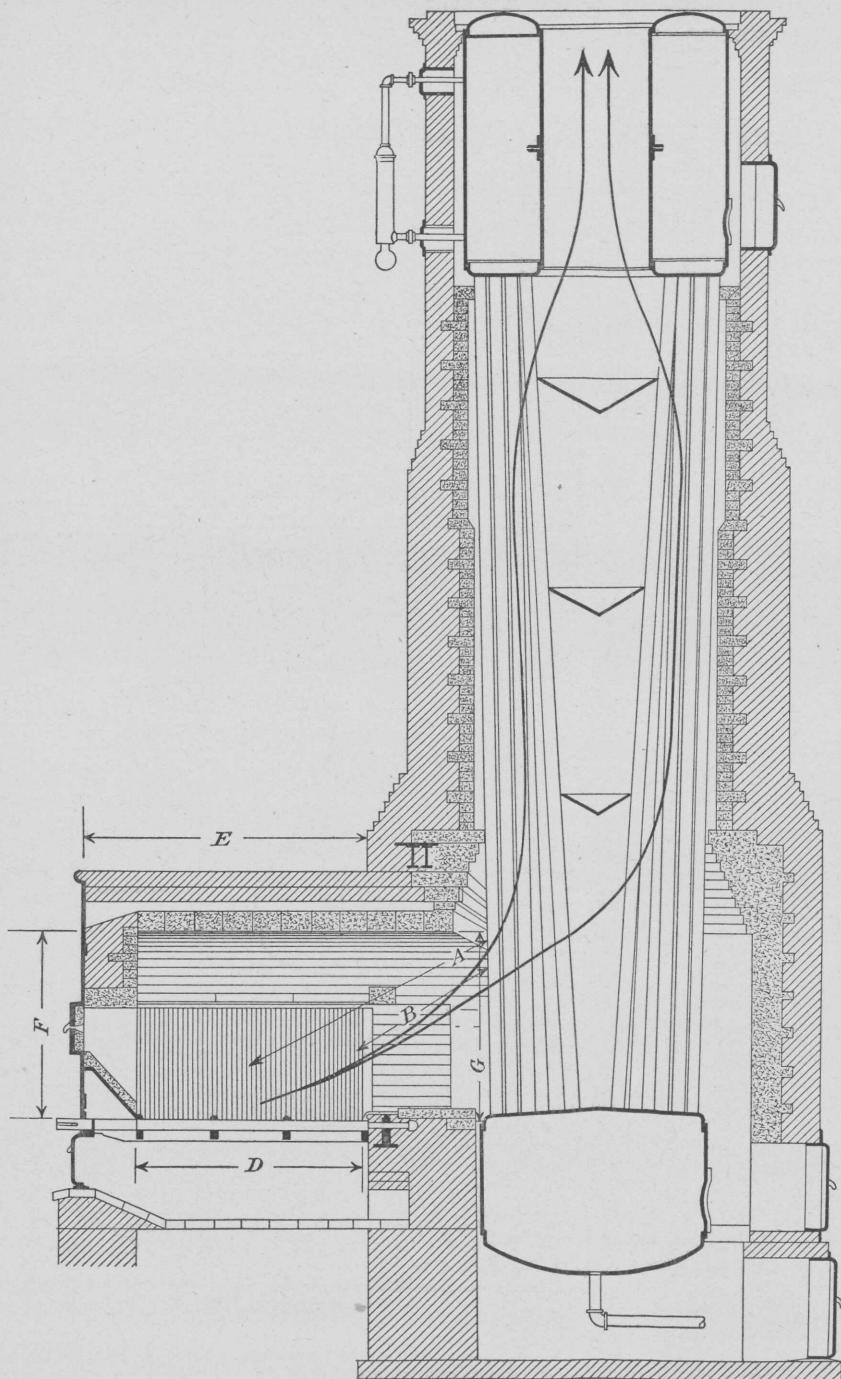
Side-feed stoker in Dutch oven and Cahall boiler.
